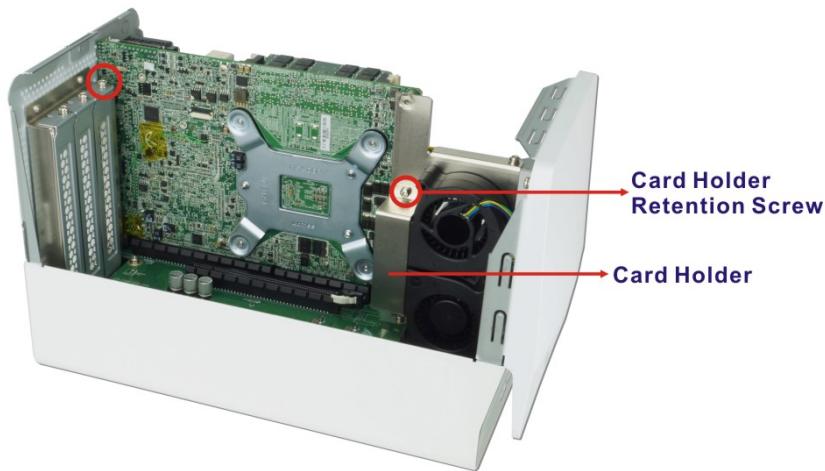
Blank Bracket Screw and Card Holder Screw
